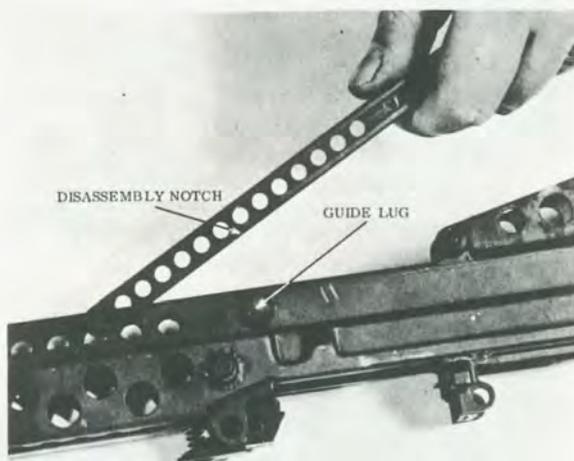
Cocking handle guide lug and disassembly notch.
